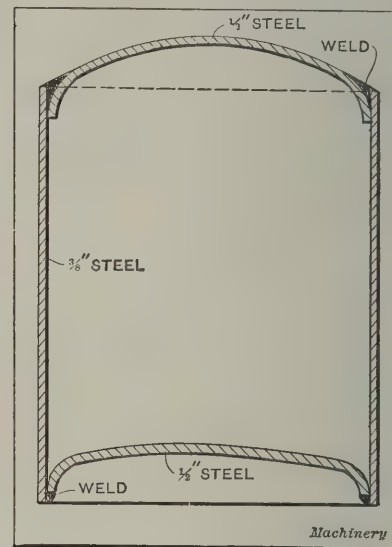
Example of Tank welded by the Oxy-acetylene Process
